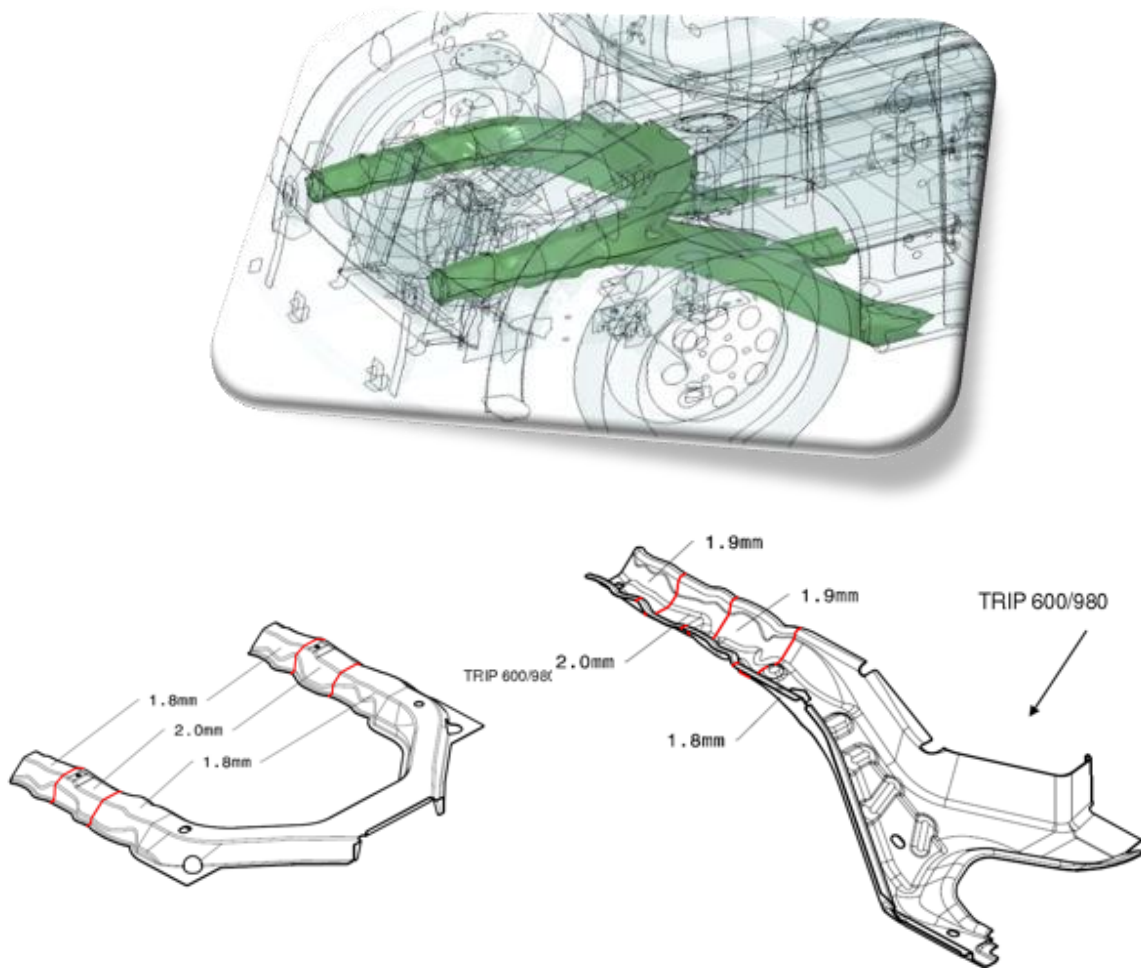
Longitudinal Rail Geometry (Upper and Lower)
